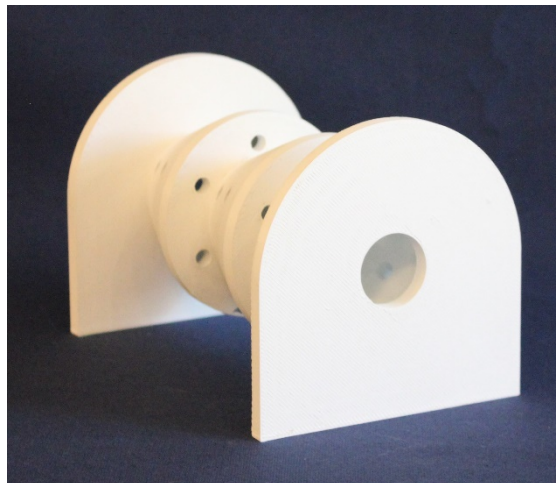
SISO - Series of Diverging Nozzles with Radial and Axial Perforations and a Constricted Opening at the Output Plane - Prototype - Aft View
